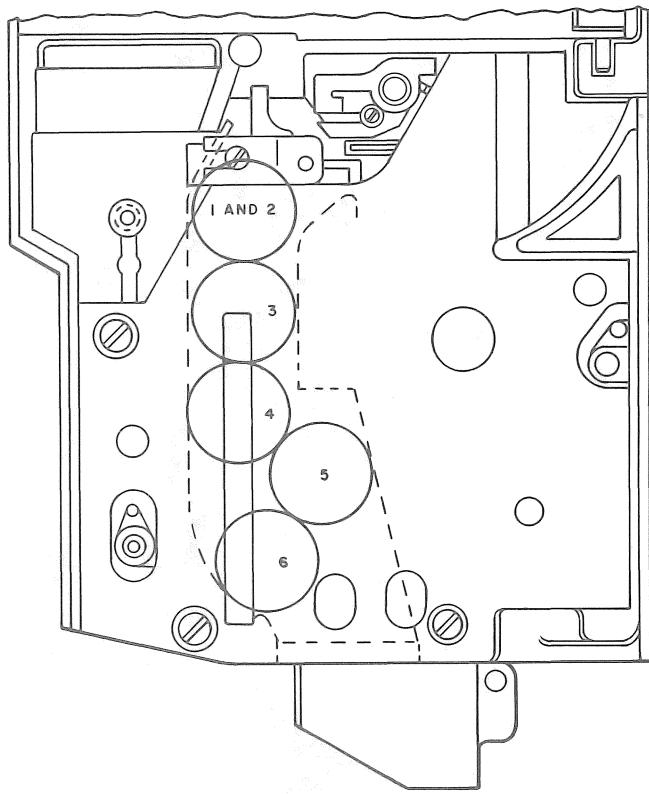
Lower Portion of Coin Chute With Six Dimes Jammed
